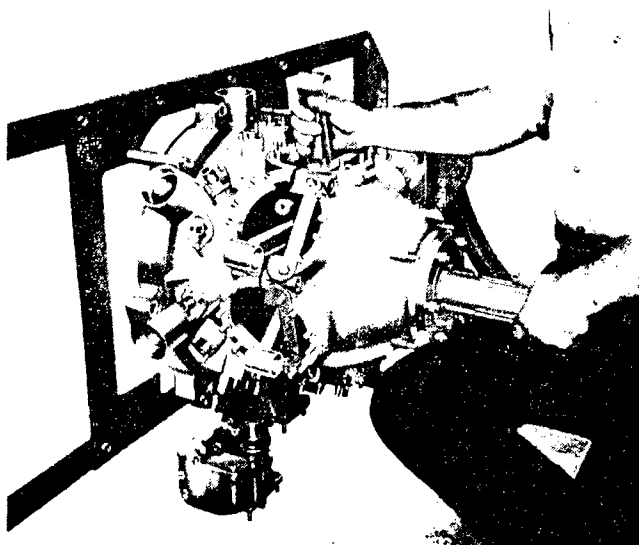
Removing Front Crankcase and Crankshaft Assembly from Rear Crankcase
